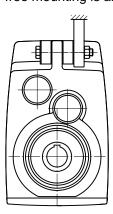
Mounting the rubber buffer (Option G and/or VG) on parallel shaft gear units
